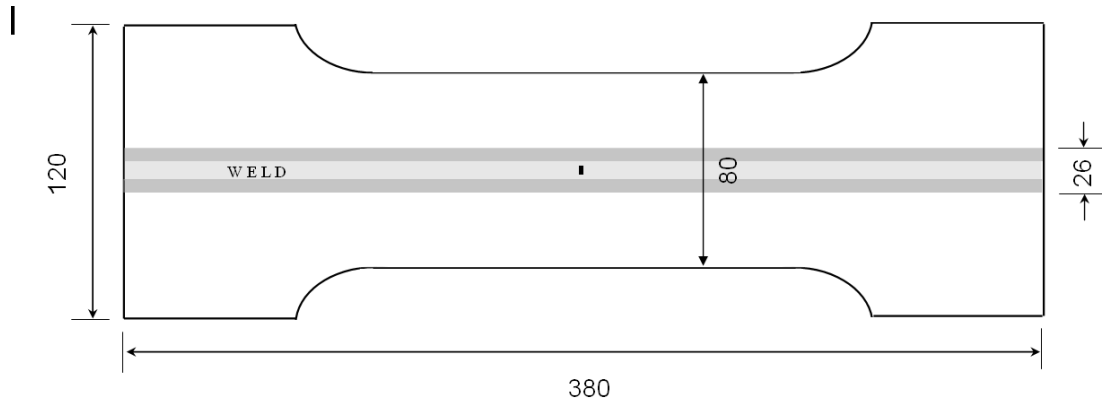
M(T) specimen: dimension and weld position (thickness = 7; unit: mm) [13].
